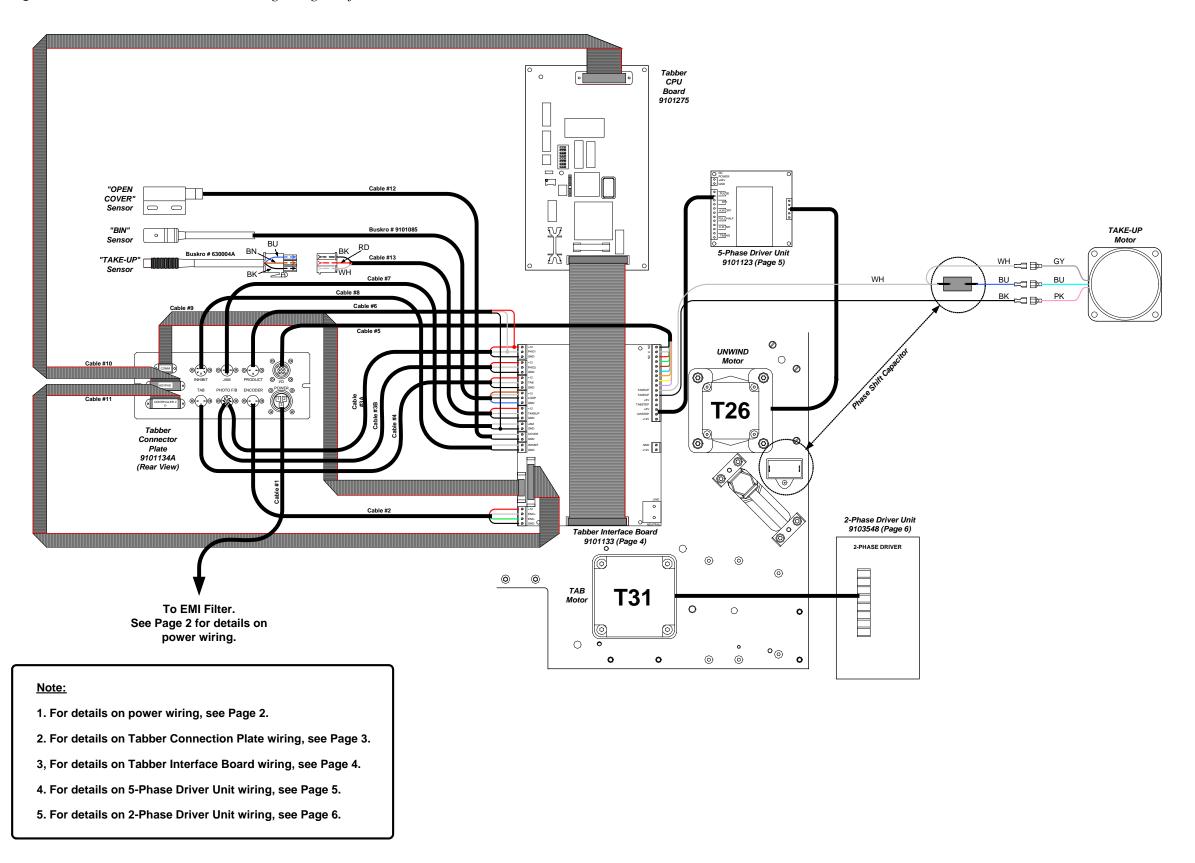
BK731-2 Tabber Head Wiring - Page 2 of 6
